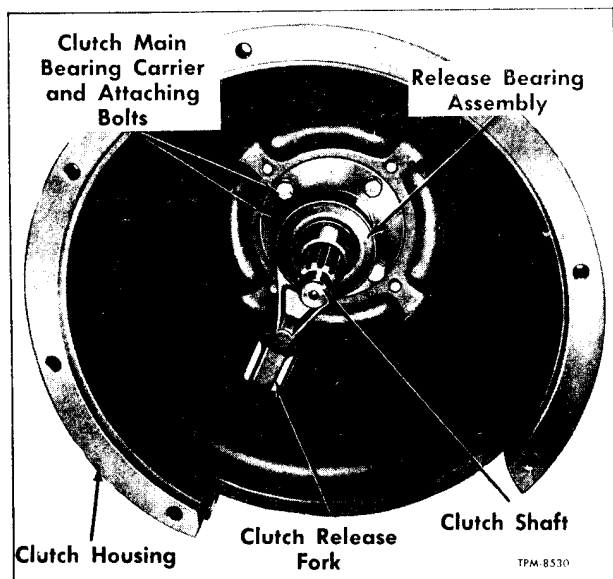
Clutch Fork and Drive Shaft Installed in Clutch Housing
